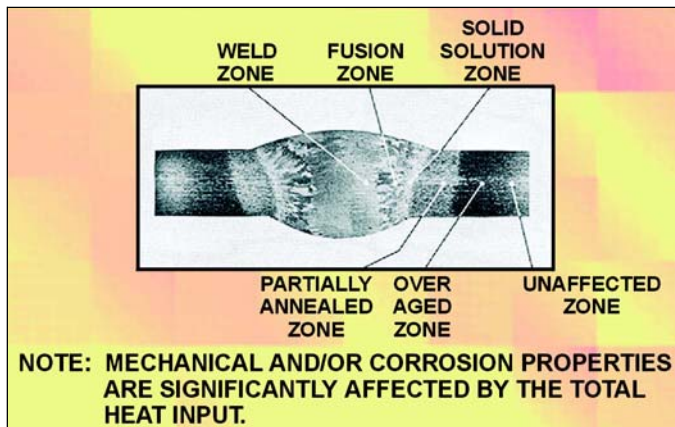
The Welding Heat Affect on a Heat-Treatable Alloy
